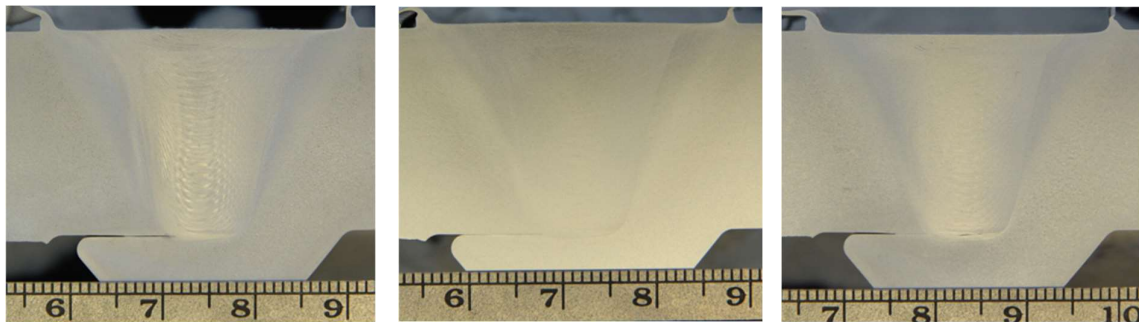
1.5_Gap_23mm weld macrography at (a) start, (b) middle, and (c) end
